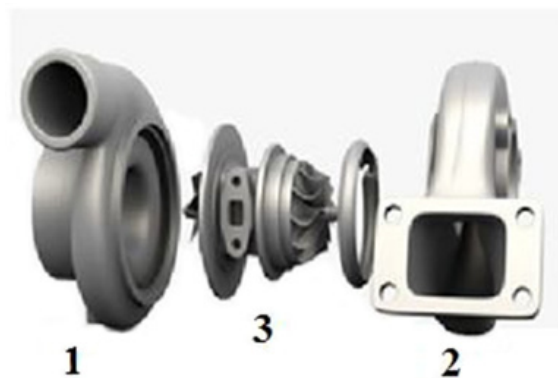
Turbocharger components: 1—Compressor; 2—Turbine; 3—Central part [10].
